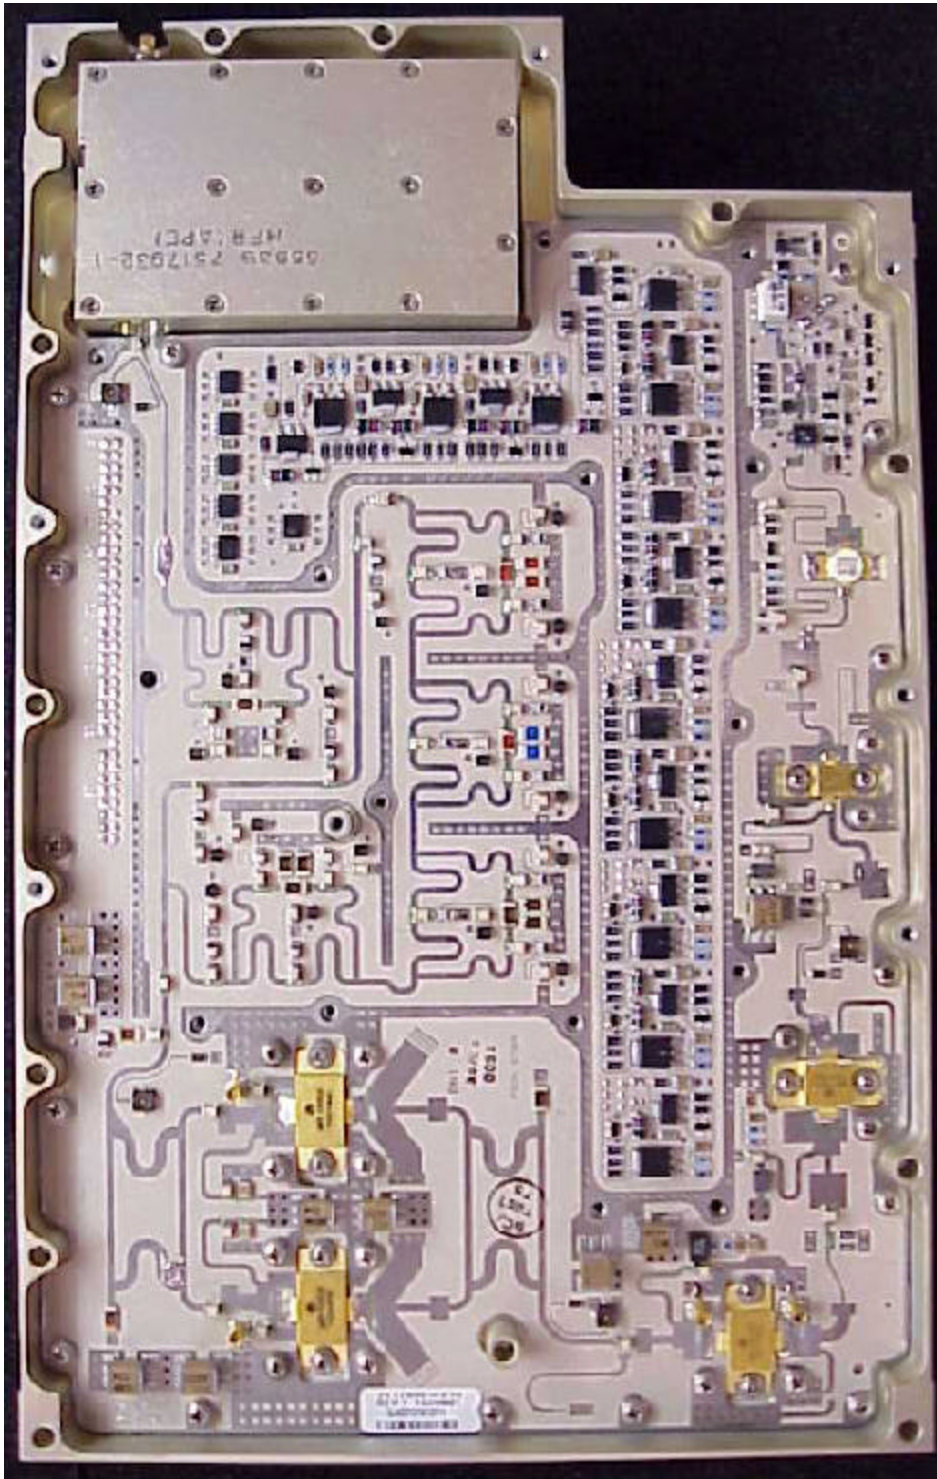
View of A3 Transmitter Assembly With Shield Removed
